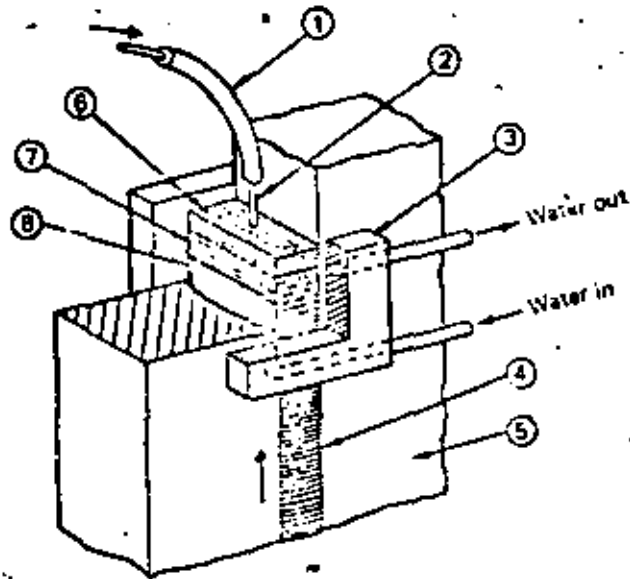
Schematic sketch of electroslag welding. (1) electrode guide tube, (2) electrode, (3) water-cooled copper shoes, (4) finished weld, (5) base metal, (6) molten slag, (7) molten weld metal, (8) solidified weld metal.
